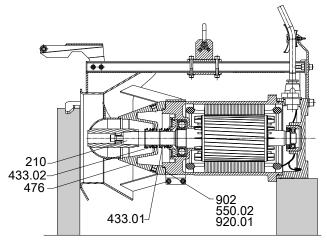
Removing the mechanical seal of an Amaline 300 with motor 8 6
